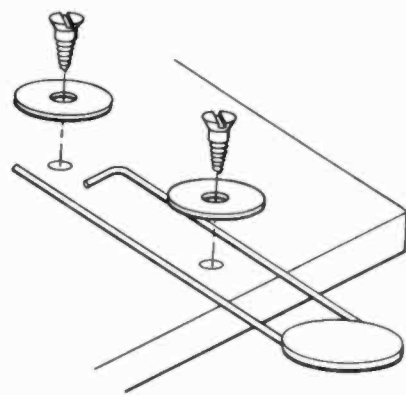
TWO WASHERS AND WOOD SCREWS on 1/2-inch centers hold key springs in place.
